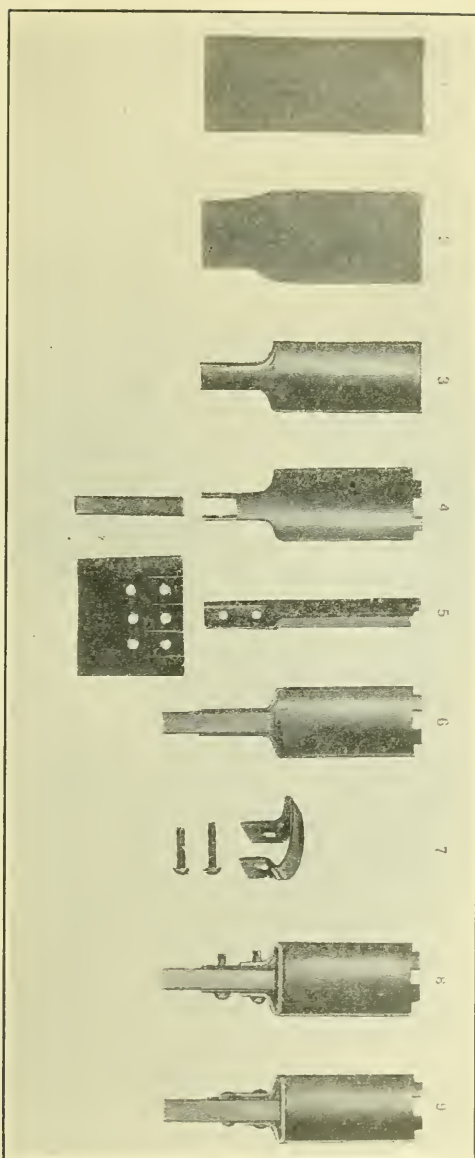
METHOD OF MANUFACTURE OF BLADING FOR RATEAU SECTIONS OF BERGMANN TURBINE
